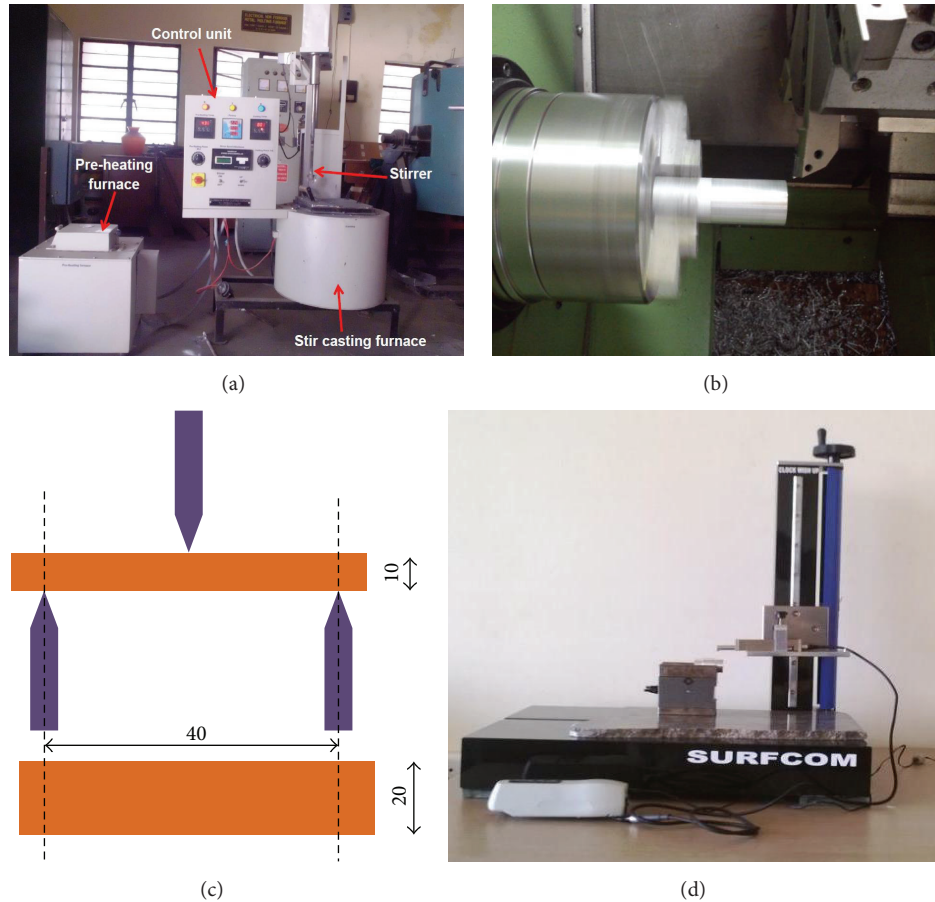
(a) Stir casting set-up. (b) Smart Jr CNC Turning centre. (c) Schematic of three-point bending test. (d) Handysurf surface roughness measuring device.
